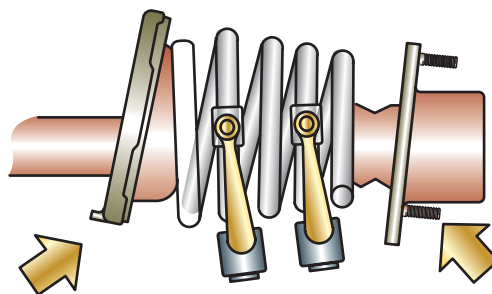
Upper insulator and upper strut mount installed on coil spring.
